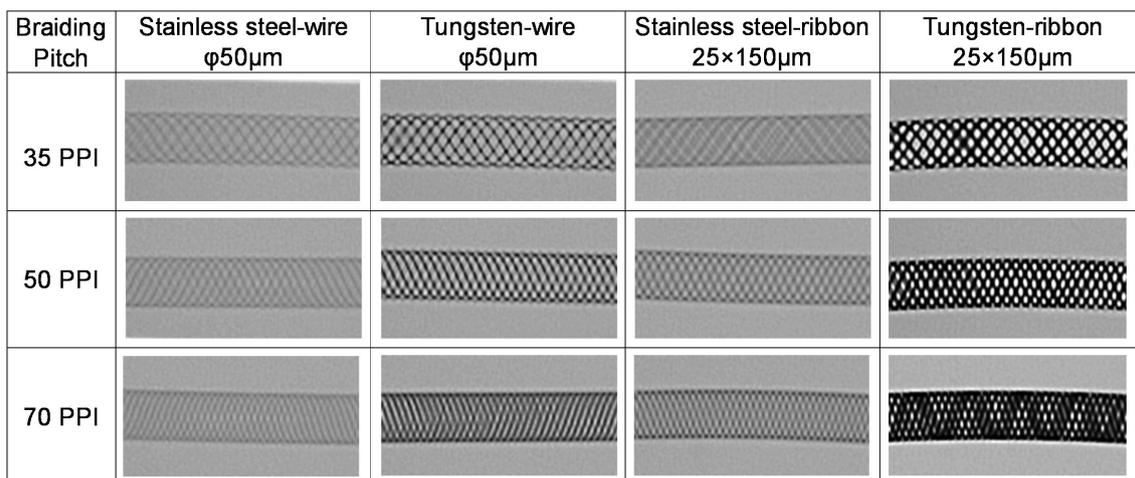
X-ray images of tubes made from braided tungsten or stainless steel wire or ribbon, captured using a TOSRAY-V150M2/6S X-ray inspection system (Capture condition is 40kV and 0.1mA)
